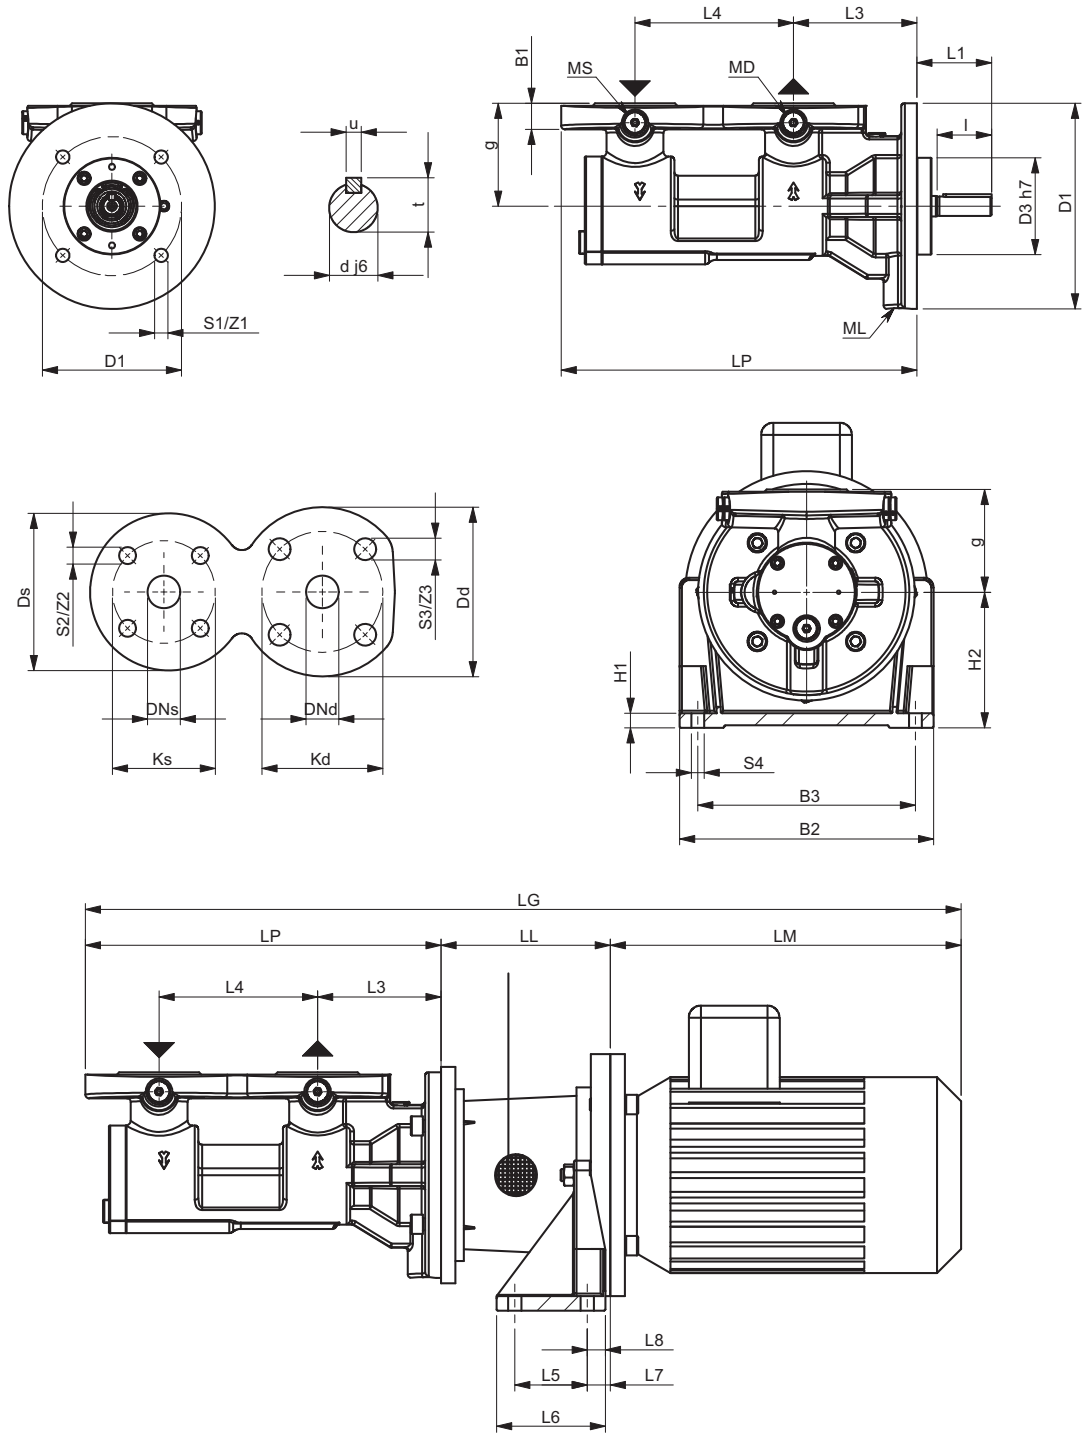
Dimensional drawing of LFT-pump and pump unit
